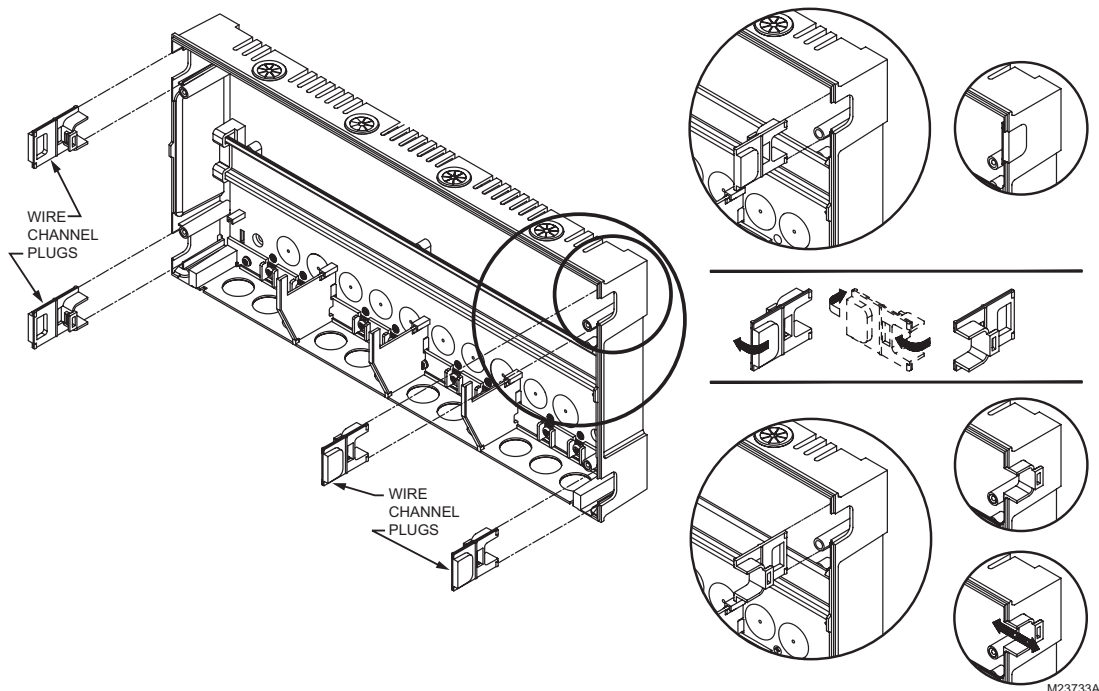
Orientation of wire channel plugs for creating pass-through wire channel and for joining Control Panel to Expansion Zoning Panels.
